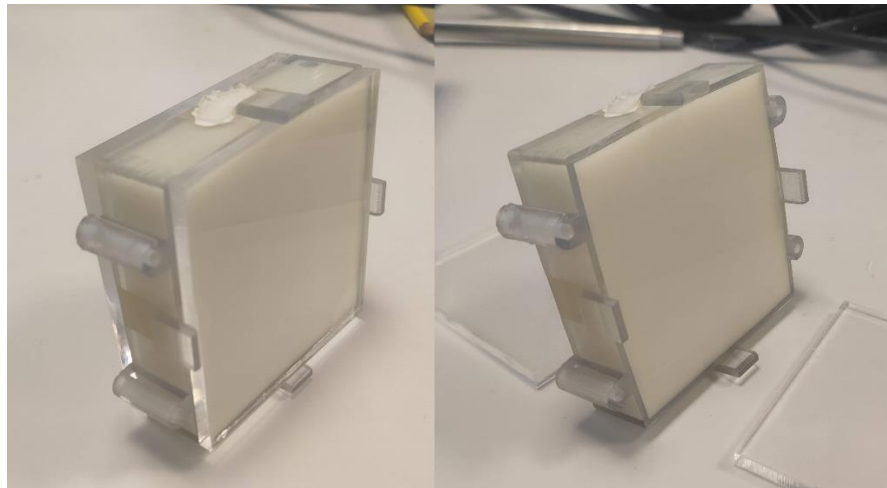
The non-thermochromic layer. Left, the layer in its mould after casting. Right, removal of the methacrylate sheets leaves the sample ready inside its casing.
